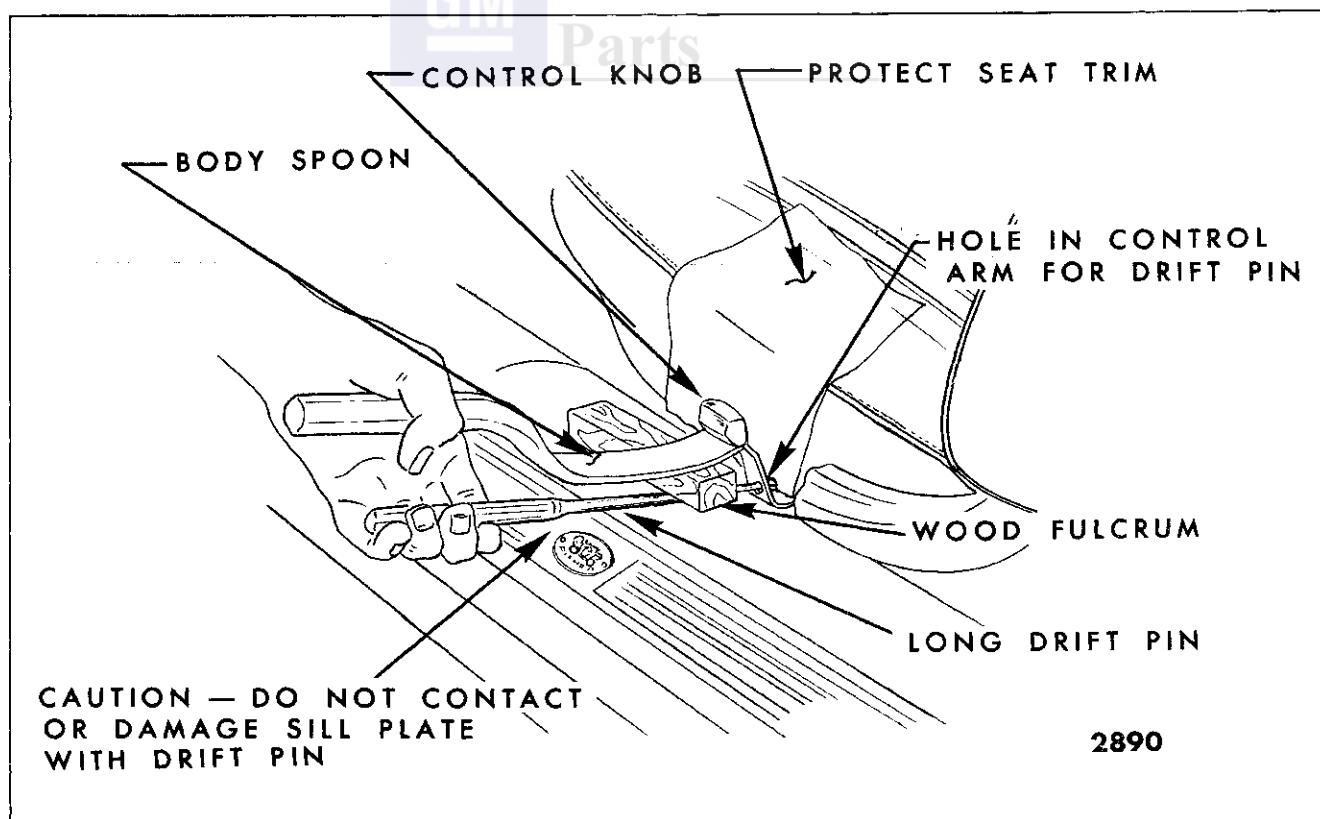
Front Seat Adjuster Control Knob — Removal
